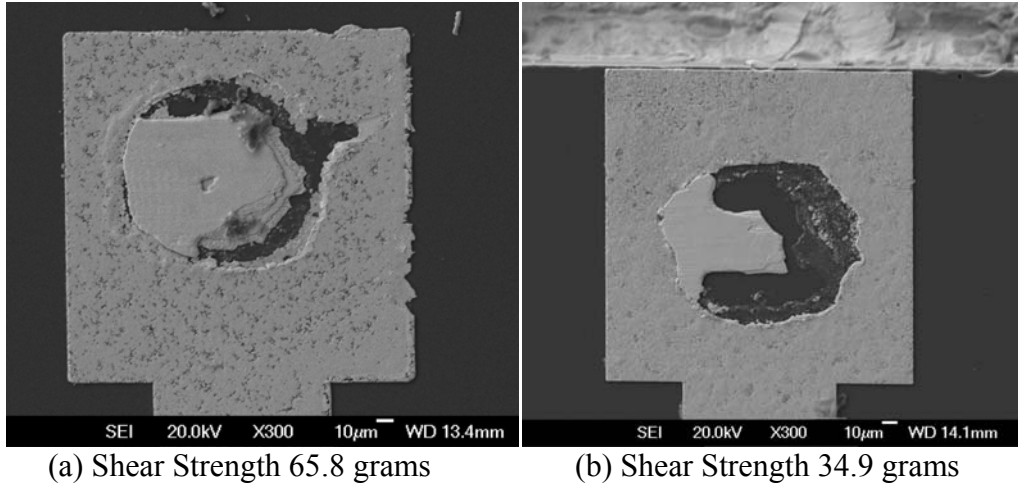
Wire Bonding Pad after Ball Shear Test on Sample after 1000 Hours Aging at 320°C
